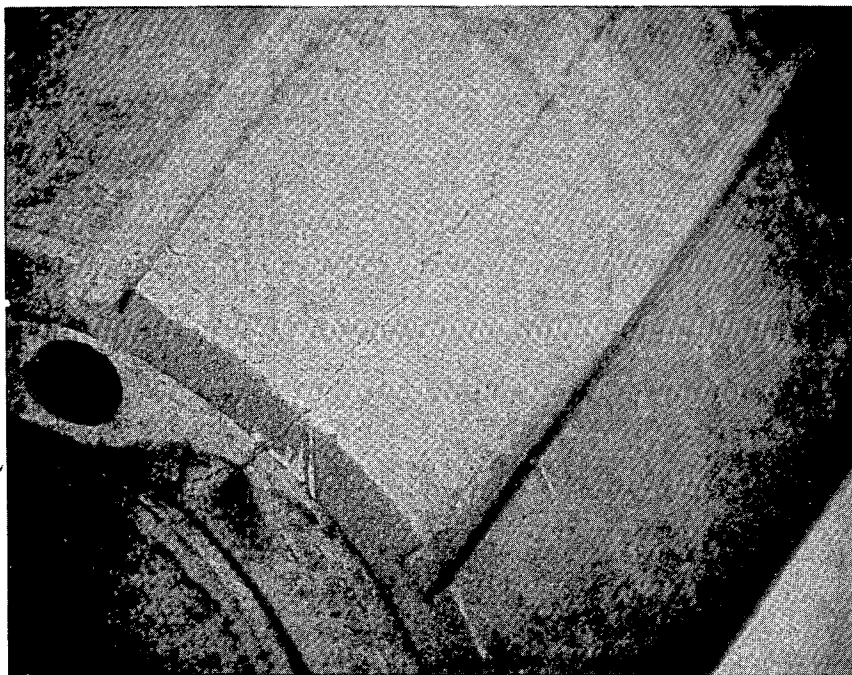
Close-up of external crack shown in Fig. 7-7
